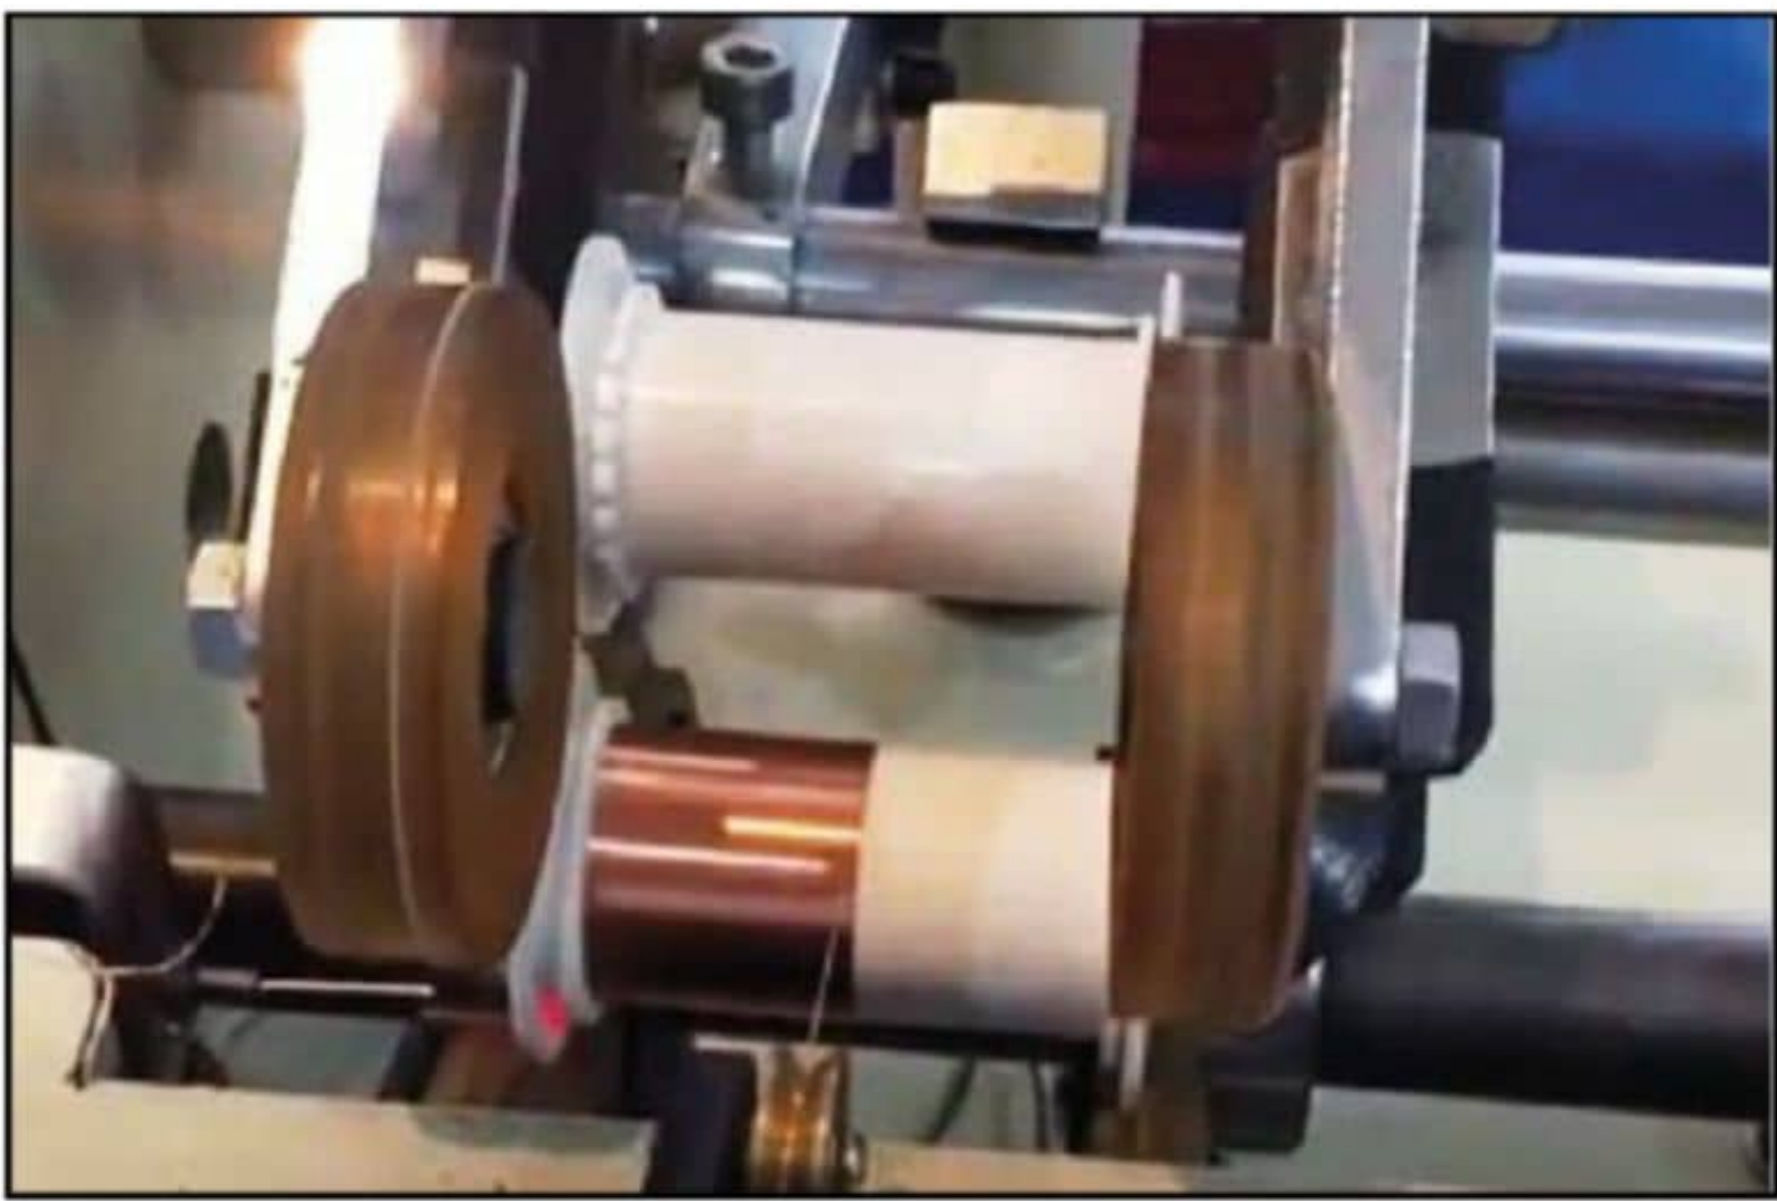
R core Winding Machine (Image Source: Zhongshan Shili Winding Equipment Co., Ltd., www.zsshili.com)
